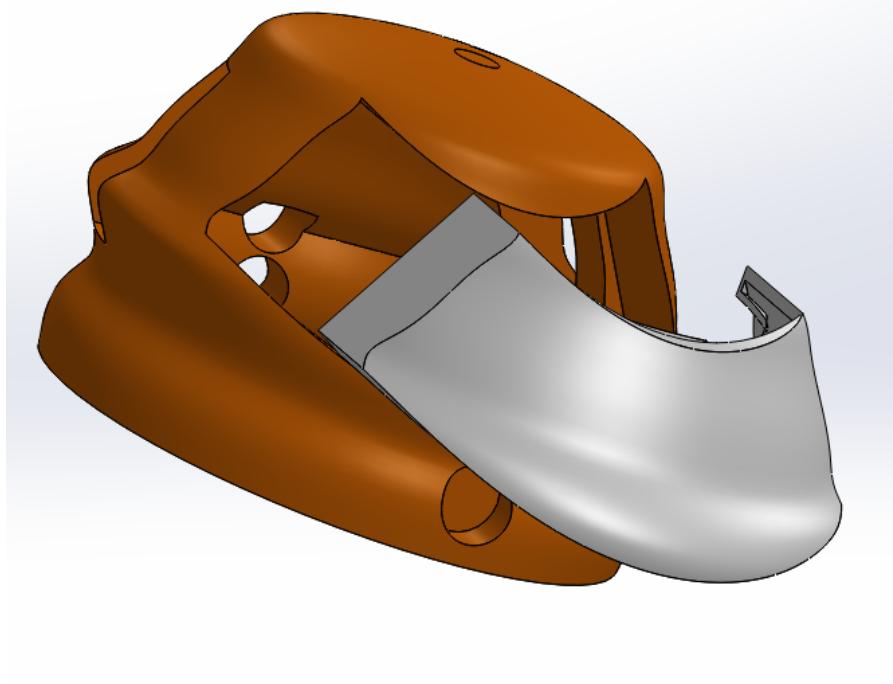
Ferrarer, Auston: Assembly Step 1
